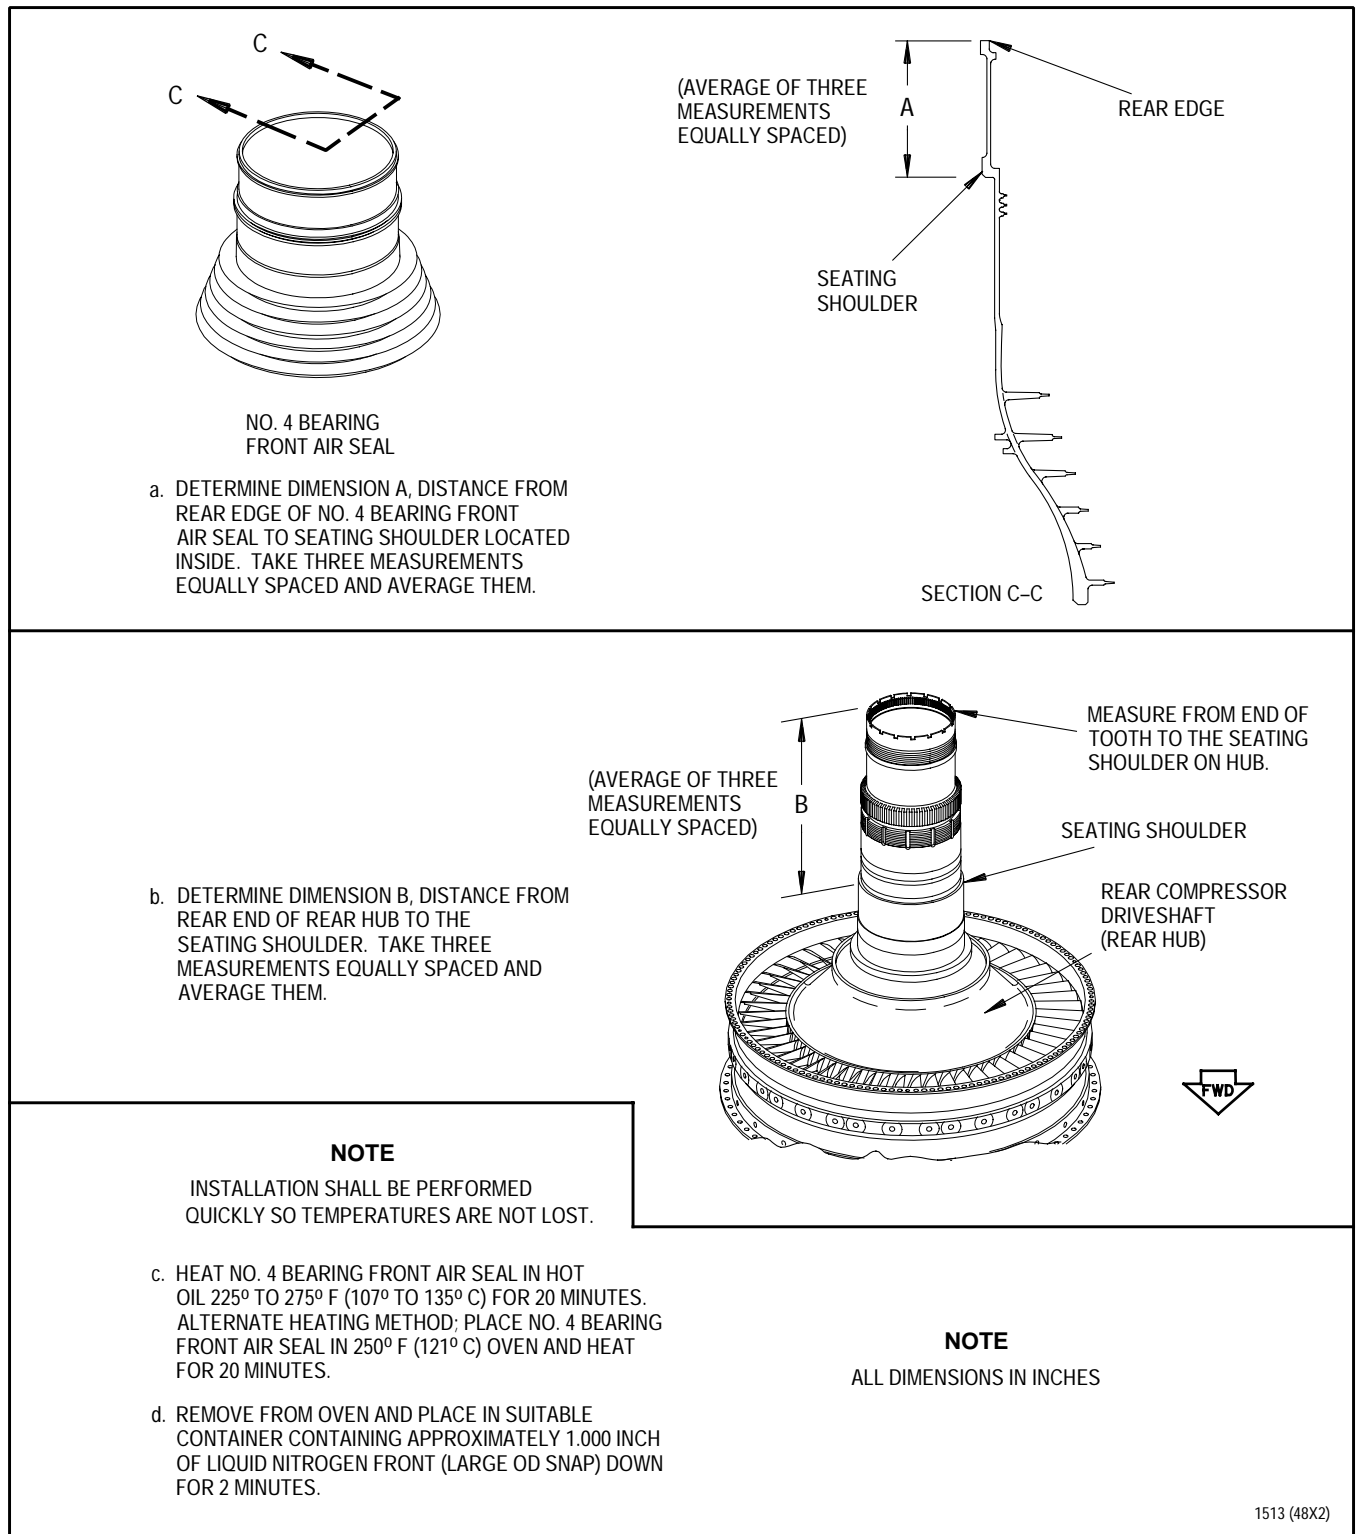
A. No. 4 Bearing Front Air Seal - Installation (Sheet 1 of 4)
